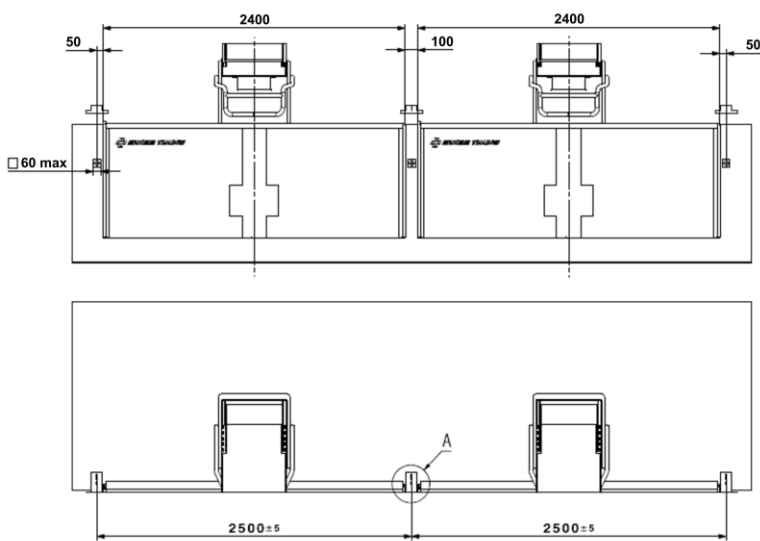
Touchpad 240x90 / Angle bracket mounting
